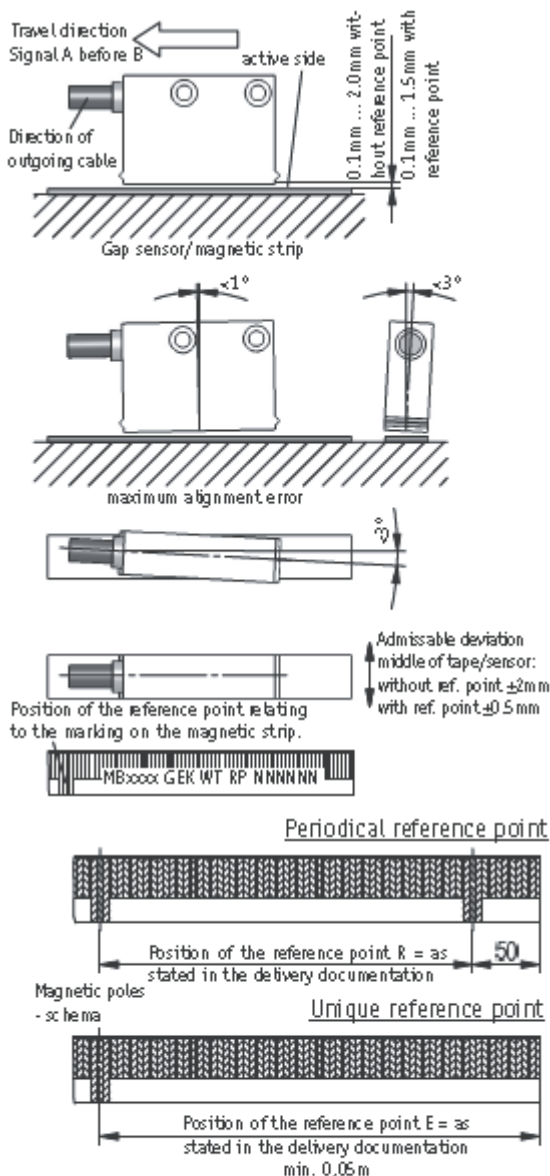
Definition of the counting direction with magnetic strip and assemblage sensor/magnetic ring, gap measure, tolerances
